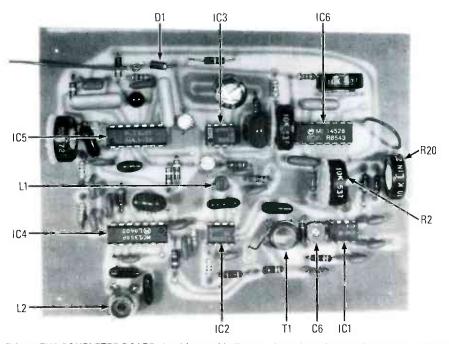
THE COMPLETED BOARD should resemble the one shown here. The locations of several key components have been noted.
